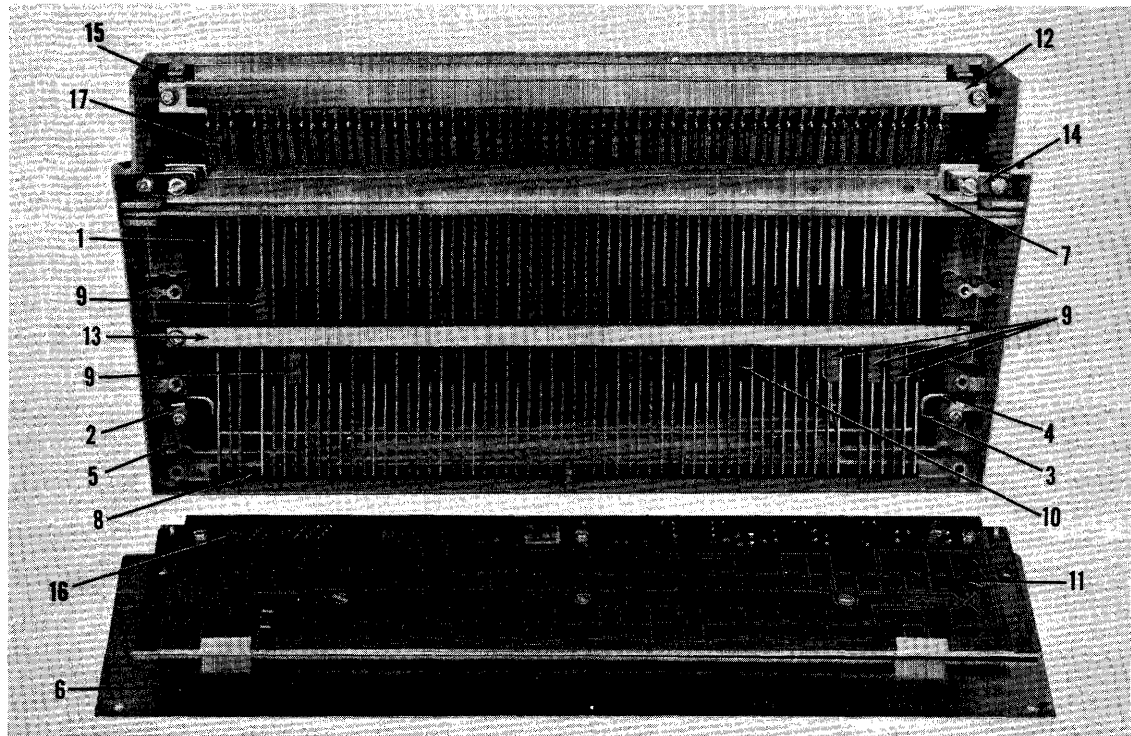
Interior of Keyboard Assembly TermiNet 300 A and B Printers
